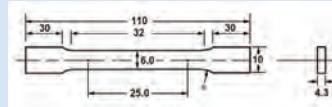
Subsize specimen for tensile tests [3]; all measurements are in millimeters
